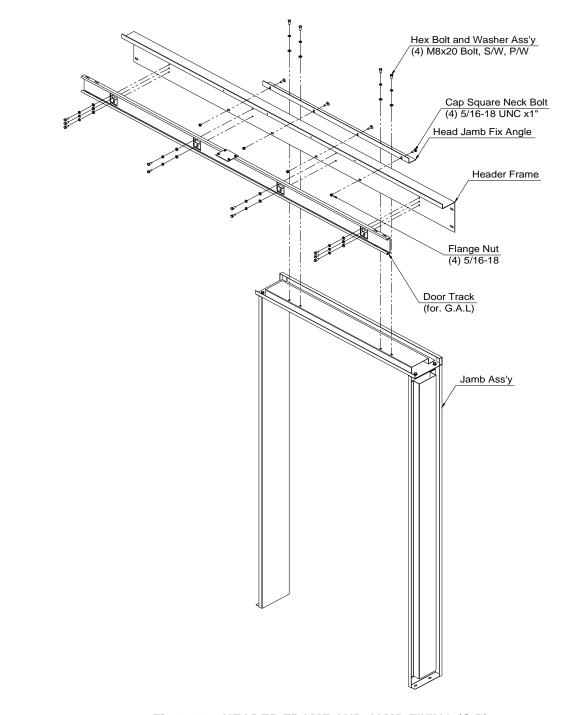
HEADER FRAME AND JAMB FIXING (C.P)
